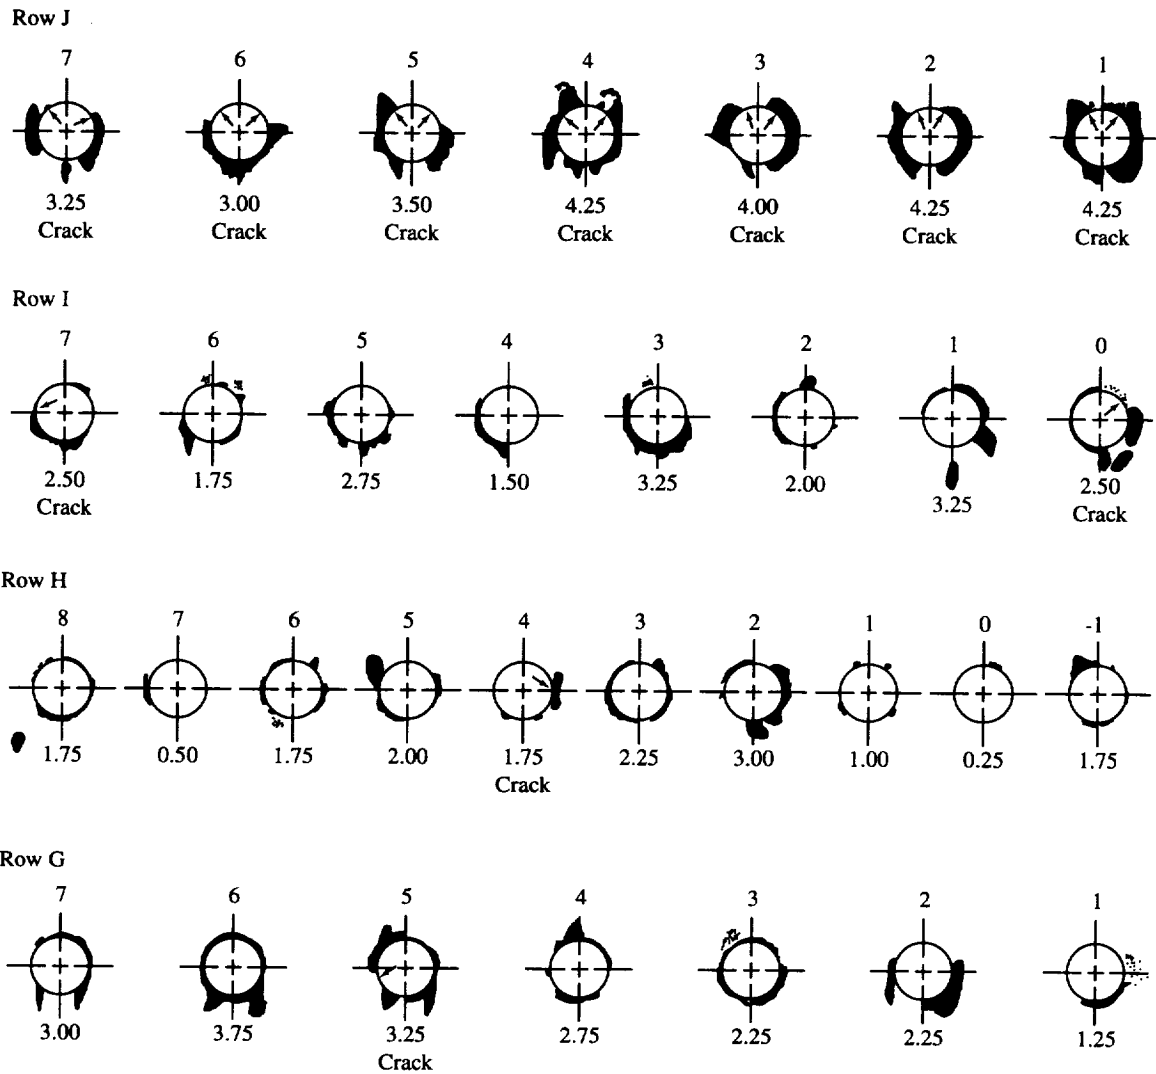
A schematic showing a portion of the inboard surface of the bay 2 lap splice outer skin. Illustrated is the location of black oxide fretting debris, the location of fretting initiated fatigue cracks (arrows), and the fretting average (FA) value defined in Figure 13.4.
